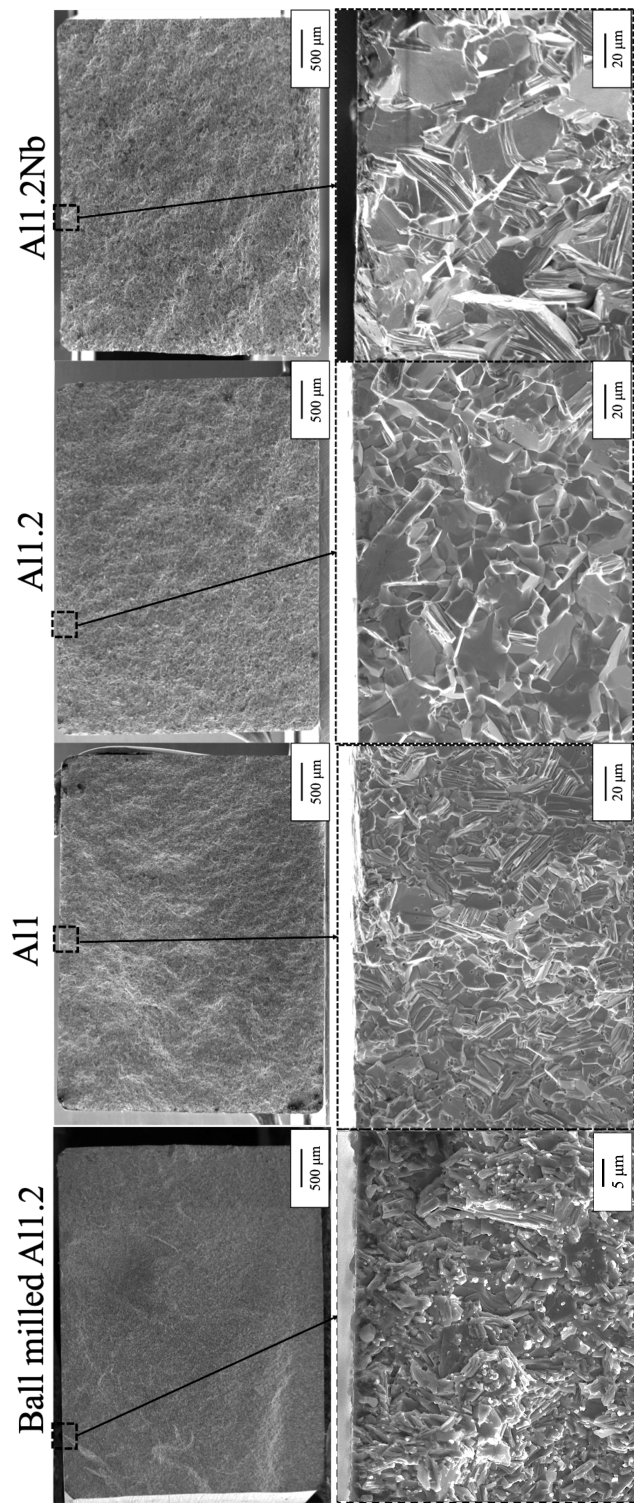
SEM image of the fracture surface of ball milled Al1.2, Al1, Al1.2 and Al1.2Nb and fracture surface around the fracture origin.
